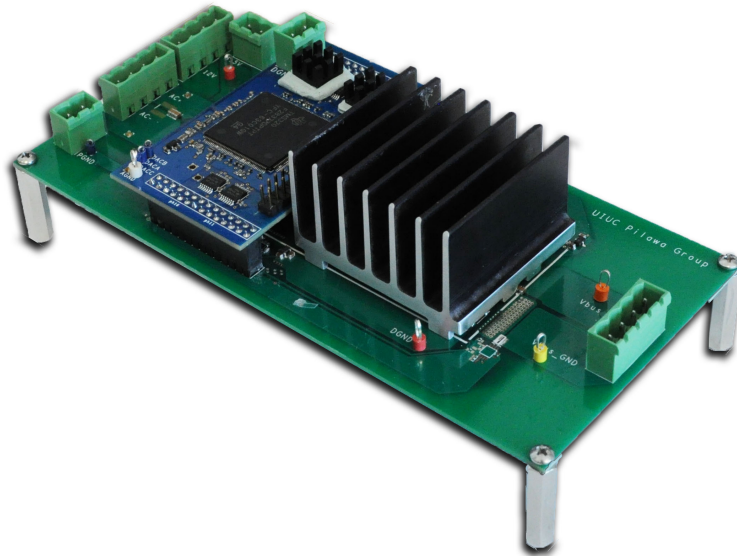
Hardware prototype with the controller board and heatsink installed.
